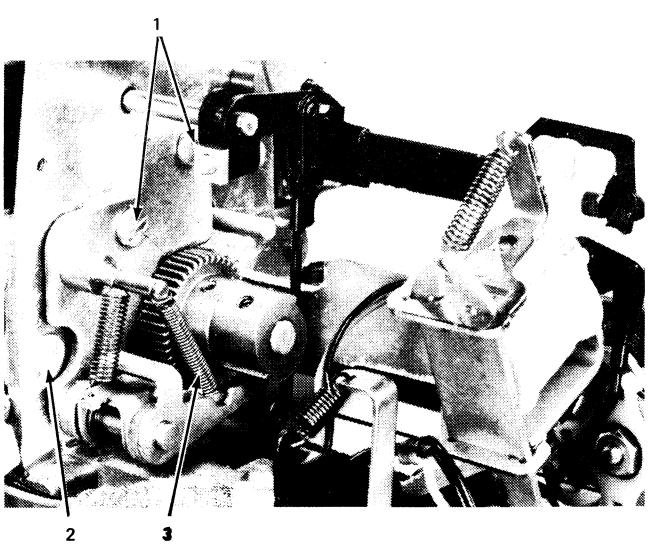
Keyboard Removal (Right Side, Printer Tilted Up)
